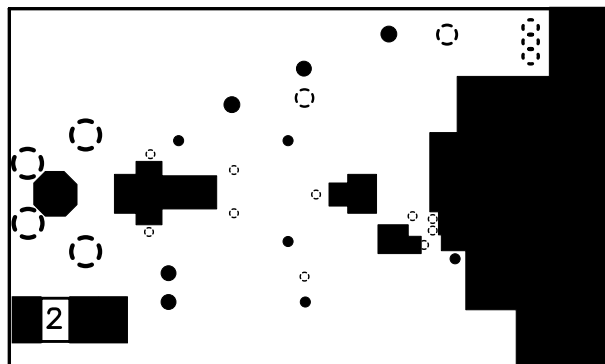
Ground Layer of EB1504/08 PCB Layout
